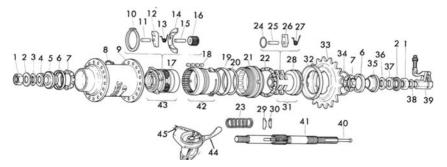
Exploded-view diagrams show both sides of being, density, and expansion. This example shows the components of a Shimano three-speed internal gear hub for a bicycle. Among the several dozen parts that constitute it are a cone stay washer (4), a planet pinion (16), and a pawl spring (27).
